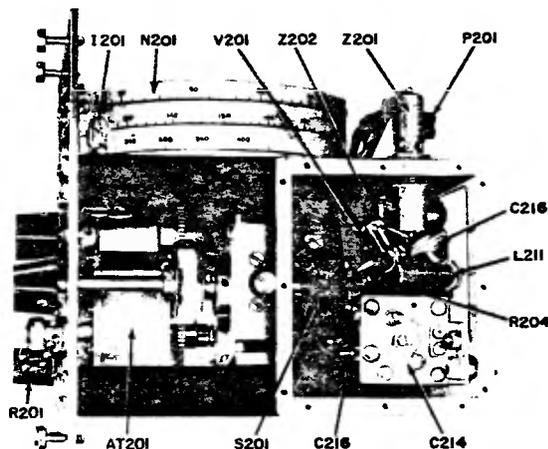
Signal Generator SG-33/TRM-1, Location of Tubes and Component Parts
